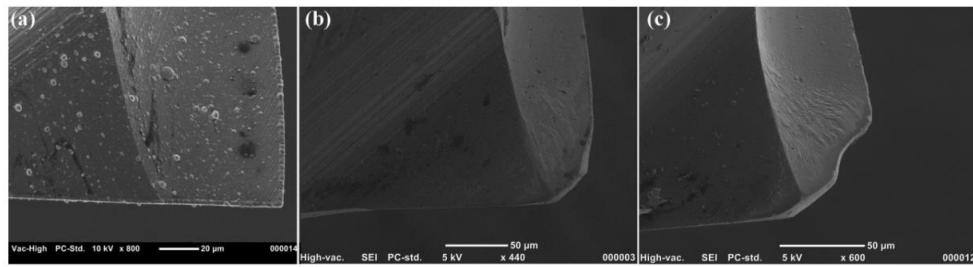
Tool nose wear for different tools a) for a fresh tool b) for tool A c) for tool B [45]
